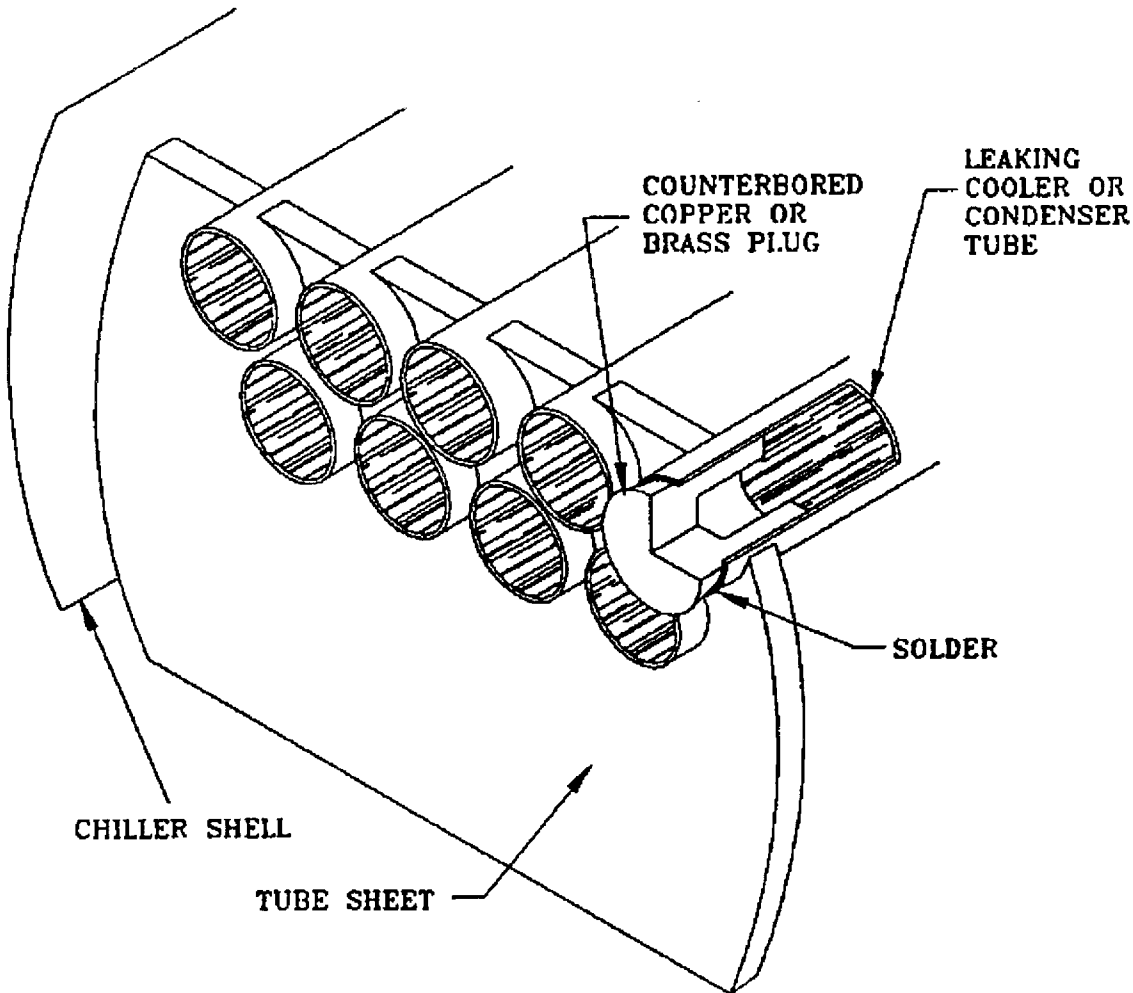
A-18 Plugging Leaking Chiller Tubes.
